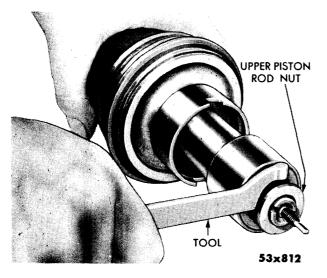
Removing Upper Piston Rod Nut (Tool C-3328)
